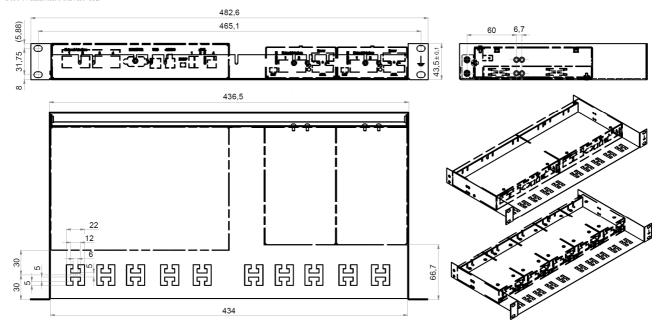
Mechanical Drawing of FG-RAIL-MRN-1U
